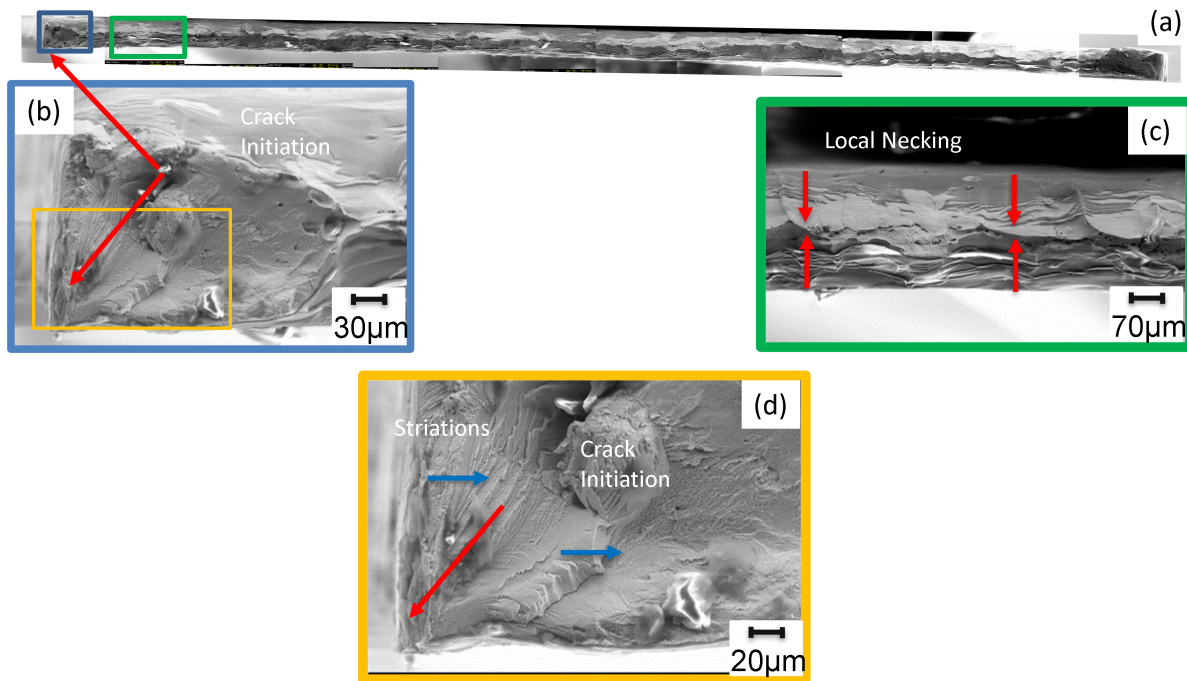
Fracture surface of single sheet sample at high temperature, low cycle fatigue, $N_f = 25,583$ cycles, (a) overall fracture surface (b) fatigue damage zone (c) trans-granular cleavage facets (d) crack initiation zone with visible striations
